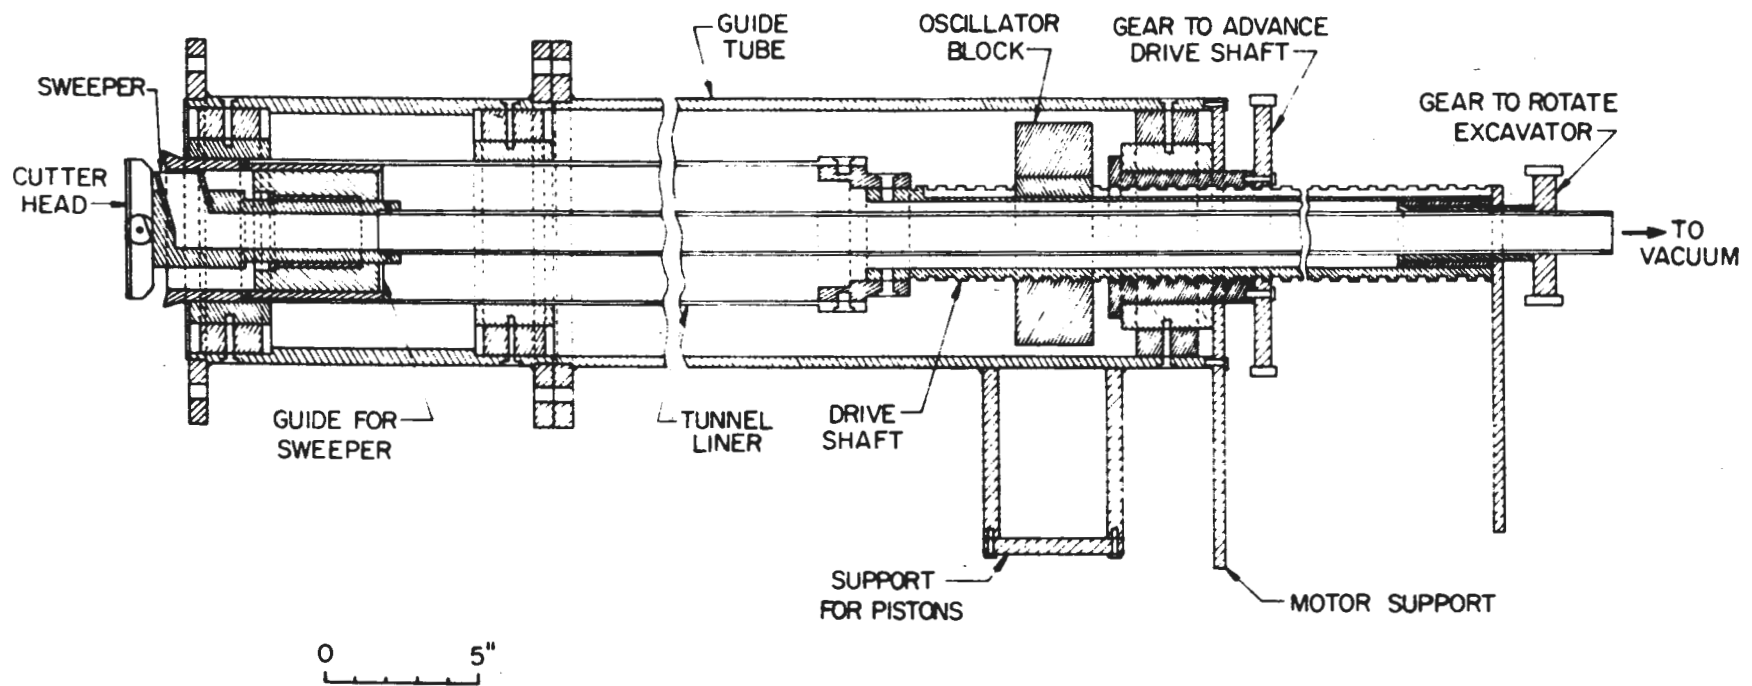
CROSS SECTION OF MODEL TUNNEL EXCAVATOR.
